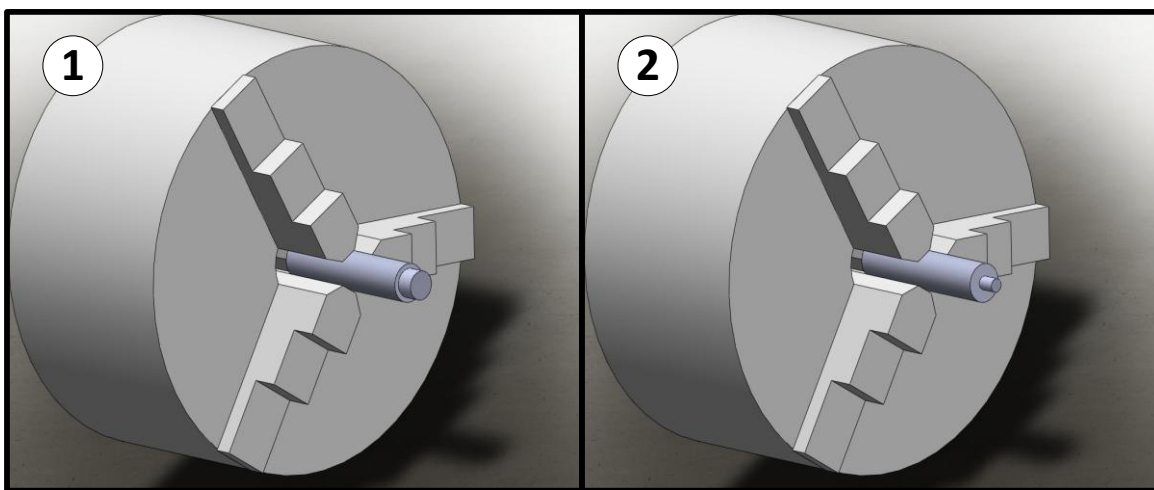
The rod is then turned down to 7mm in diameter with several passes.
